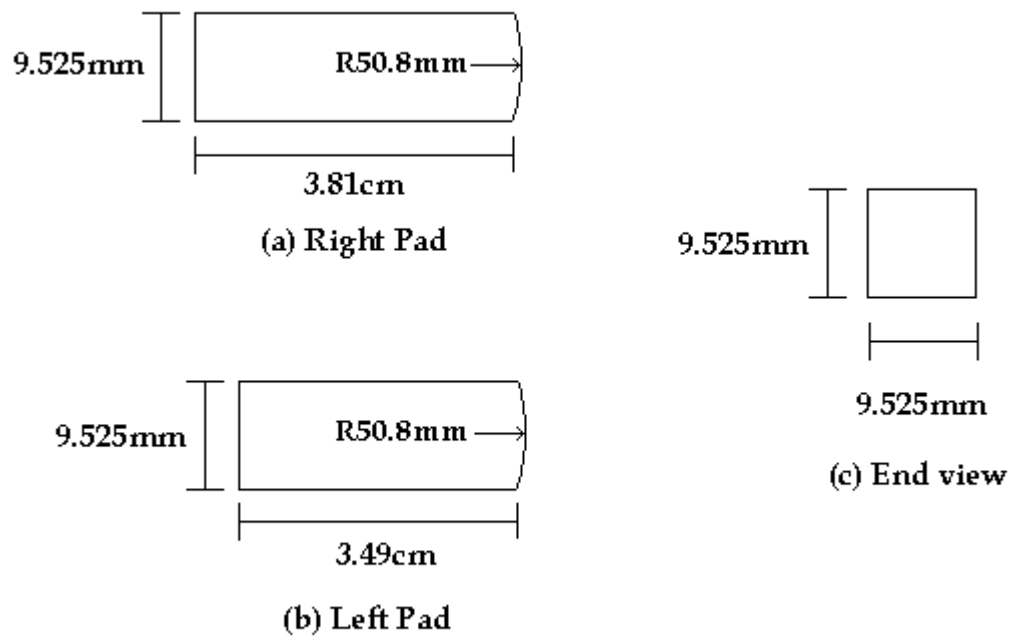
Fretting pad dimensions (a) right pad (b) left pad (c) end view
